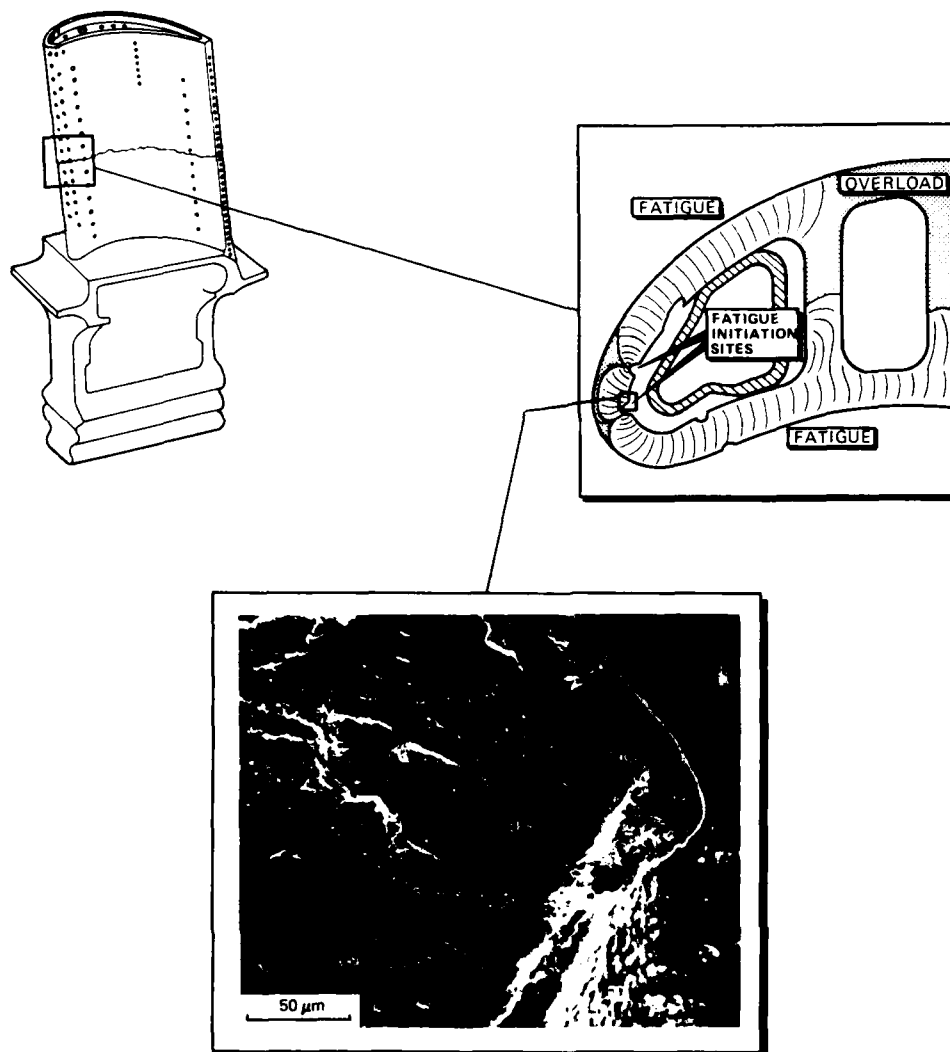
Summary of fractographic results for failed and cracked blades supplied to the NLR
